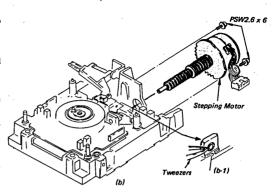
Stepping Motor (SNS-1100A), Coupling
